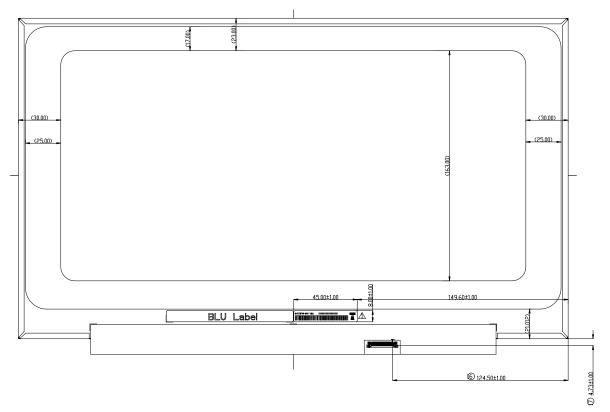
TFT-LCD Module Outline Dimensions (Rear view)
